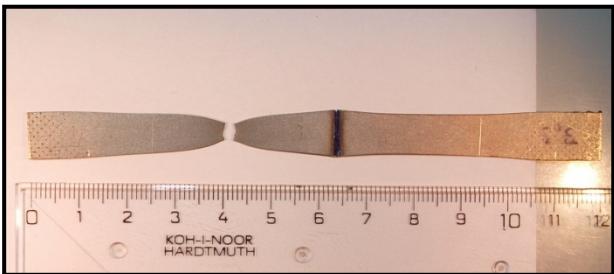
The sample after the tensile test (Specimen No. 1.7)
